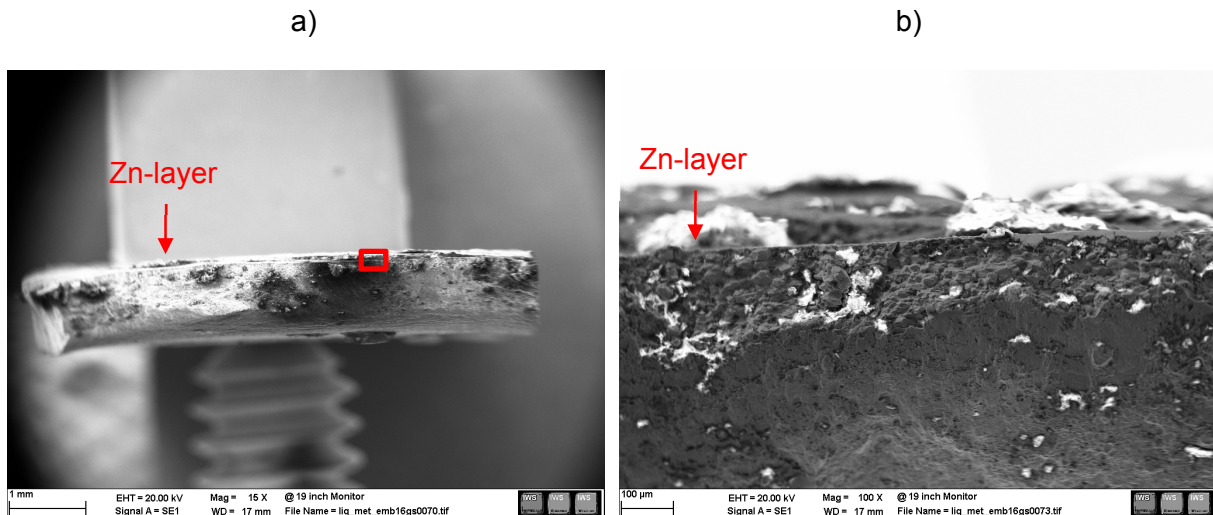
Fracture surface of ZP sample tensile tested at 800°C with 100 mm/s strain rate: a) whole fracture surface b) magnified area with visible borderline between ductile and brittle part
